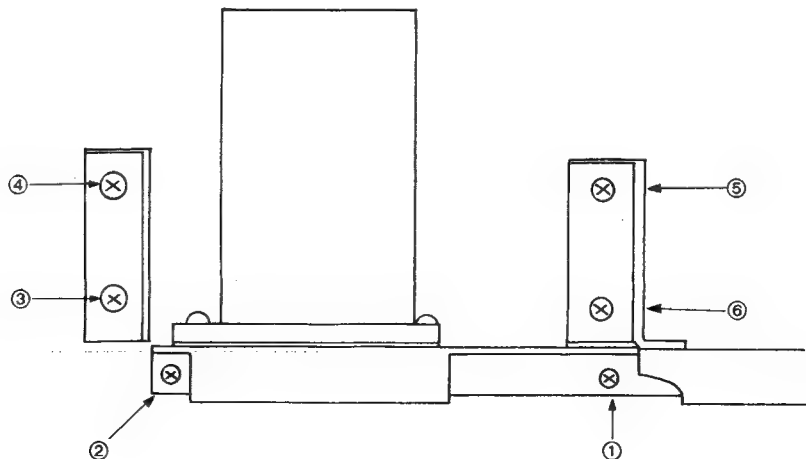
Rear View of Rotational Mechanism Unit (at Right Side)
